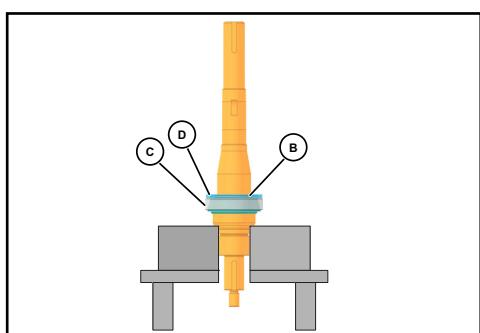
Inner &amp; Outer Spacer and Lower Cup
